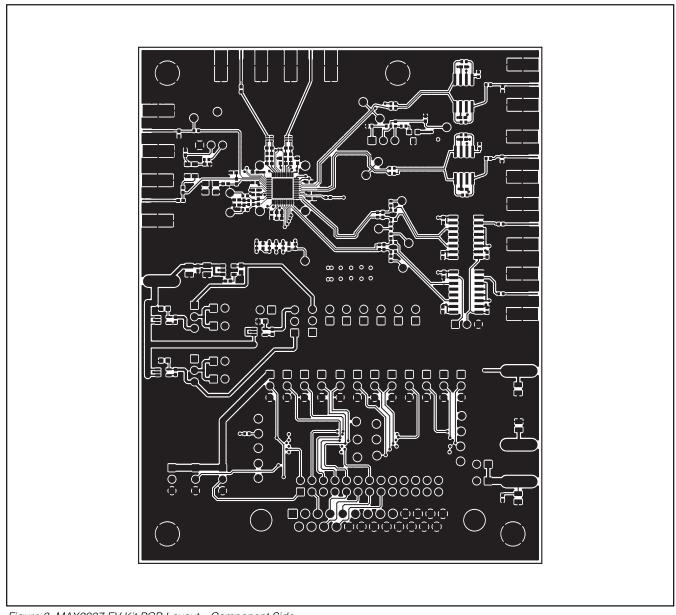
MAX2837 EV Kit PCB Layout—Component Side
